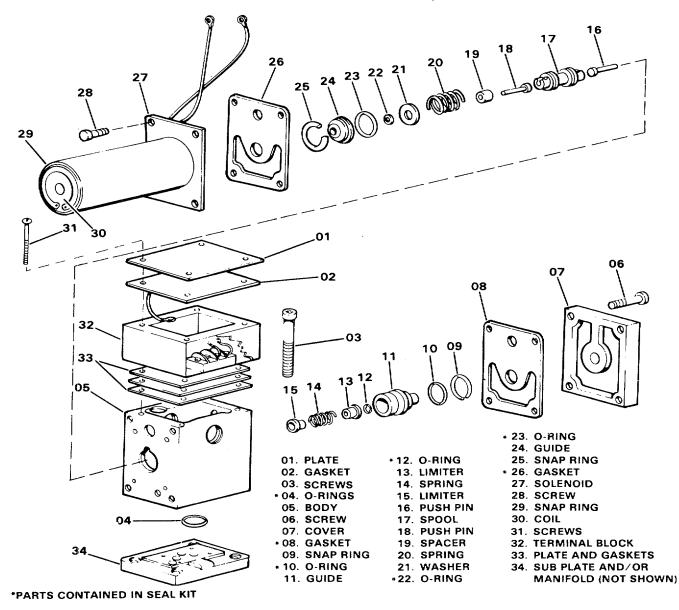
D-6. Solenoid Valves (36Z1349 and 36Z1423) 5D-8 5. If removed on disassembly, connect wire on gasket (02) to ground and install plate (01).
